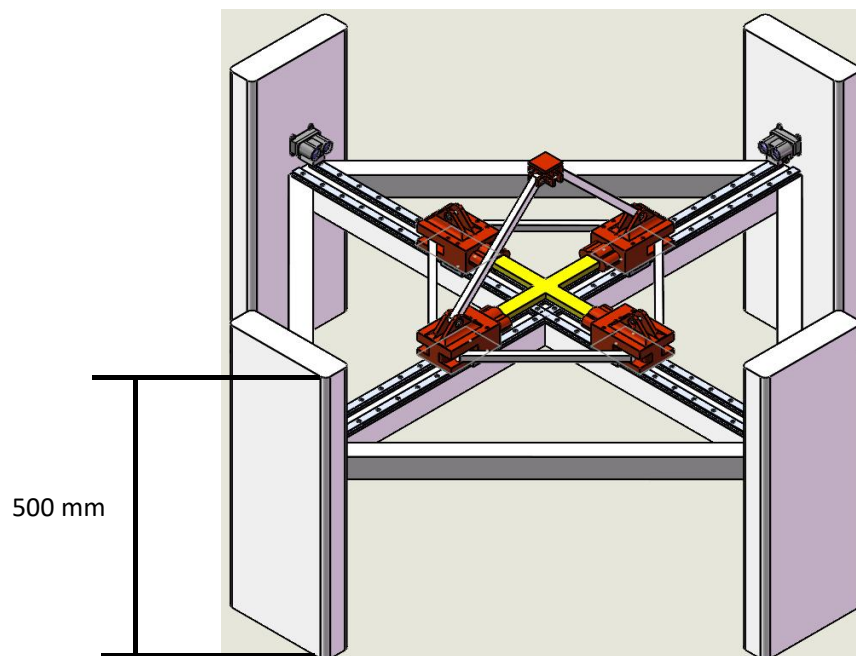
Isometric view of biaxial loading fixture after reconfiguration
